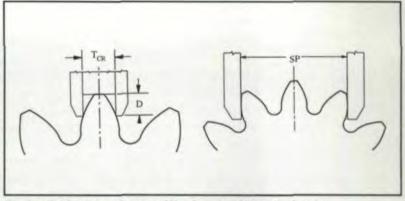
Tooth calipers. Courtesy of Van Gerpen and Reece Engineering. Fig. 3b—Span Micrometer. Courtesy of Van Gerpen and Reece Engineering.
